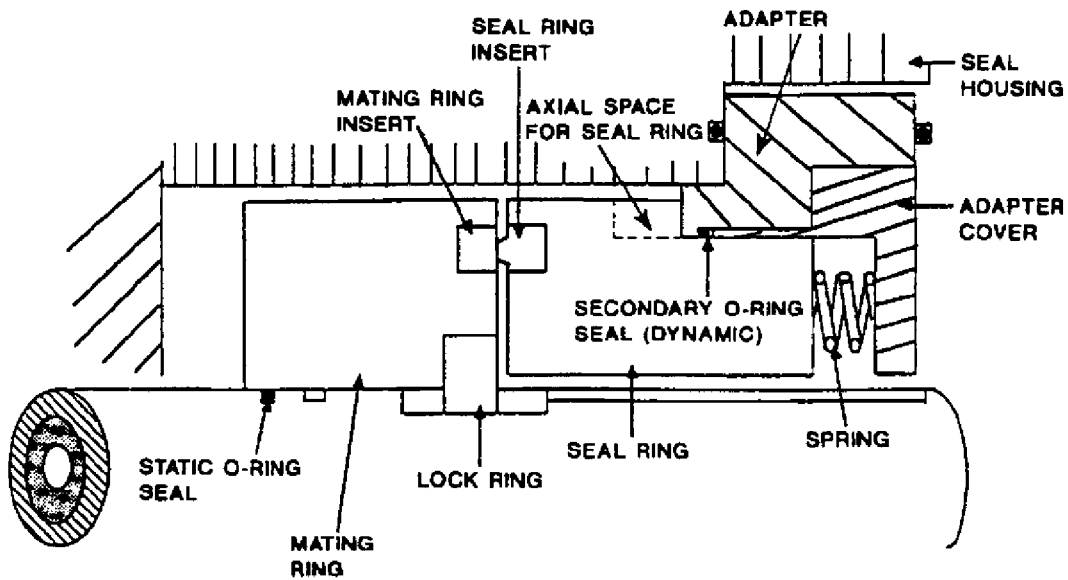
Typical SSBN 726 Class Primary Shaft Seal Assembly
